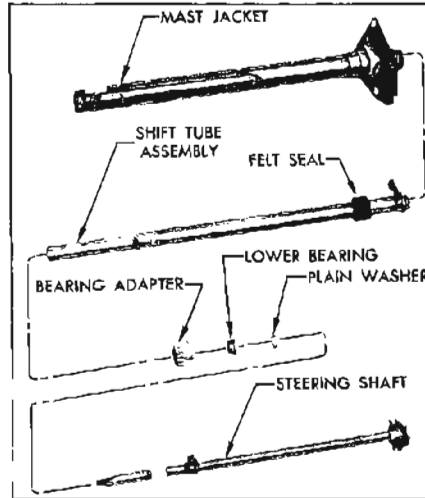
Disassembly of Lower Portion of Automatic Transmission Mast Jacket
